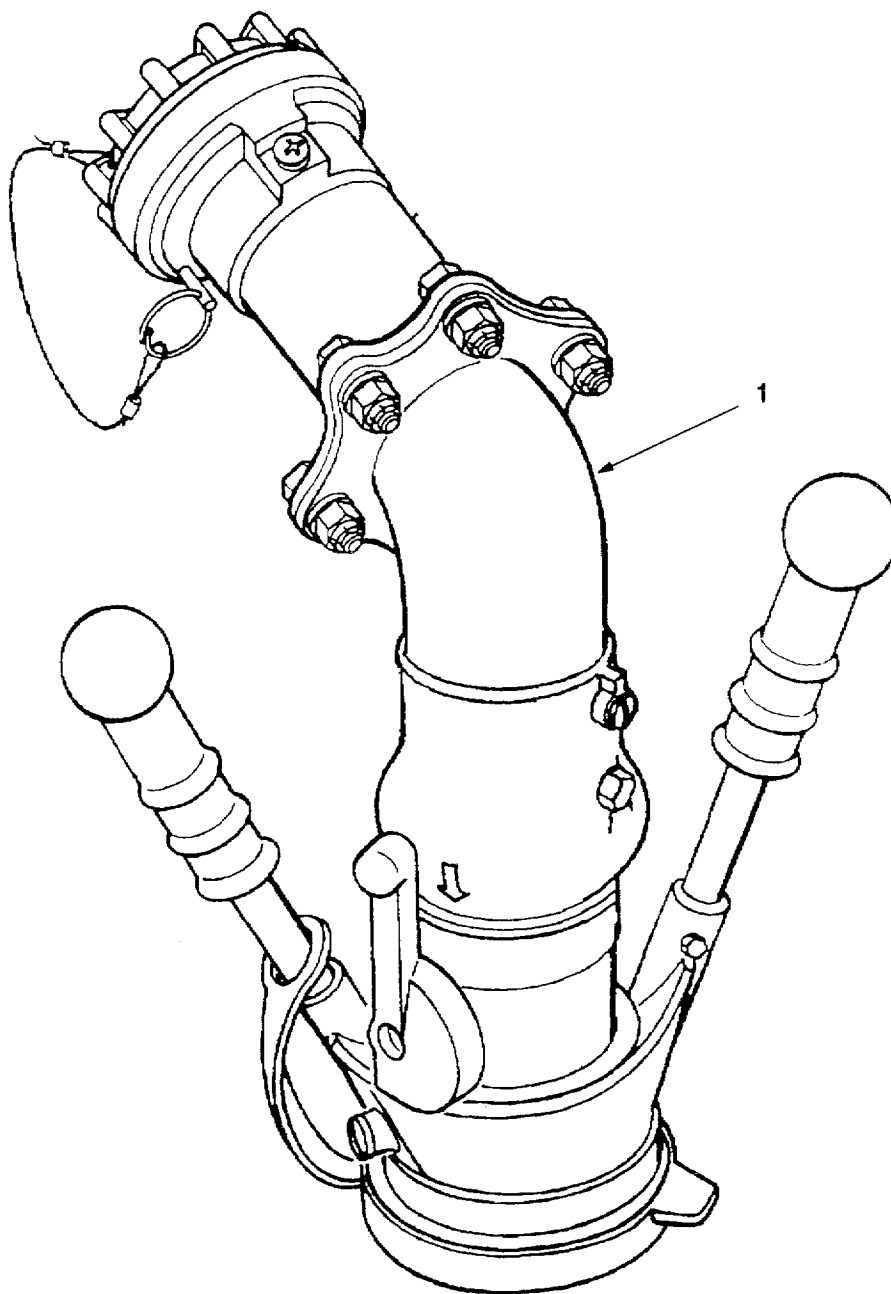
A. Pressure Fueling Nozzle Assembly (HTARS101) (Sheet 1 of 6)
